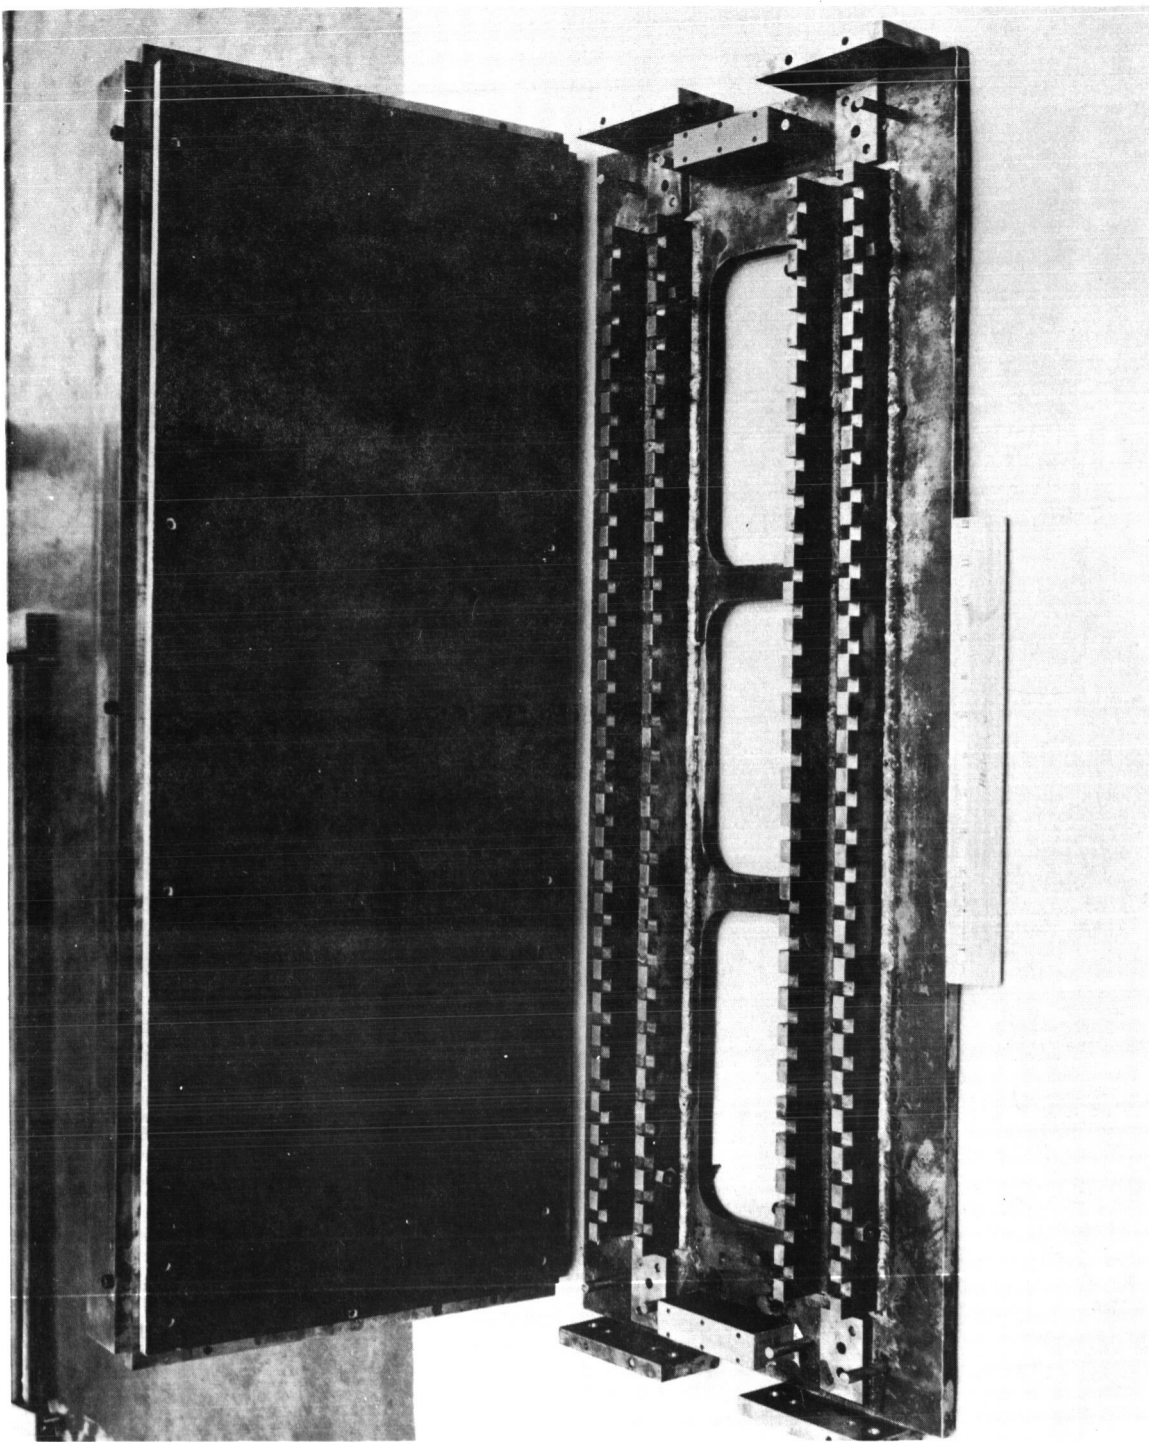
DRILL JIG WITH INSTALLED TEXTOLITE
